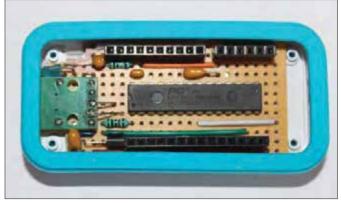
Inside and out - the Micromite Keyring Computer; built on stripboard with a handful of inexpensive components.
